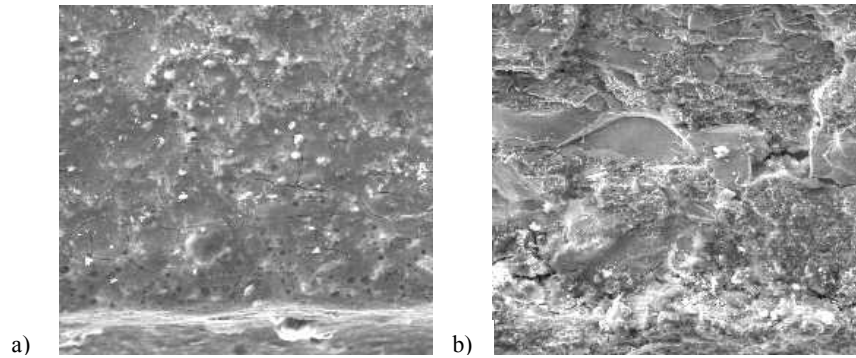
Fracture surface and mechanisms of AISI D6 specimen: a) fatigue and b) fast rupture. 500x.
